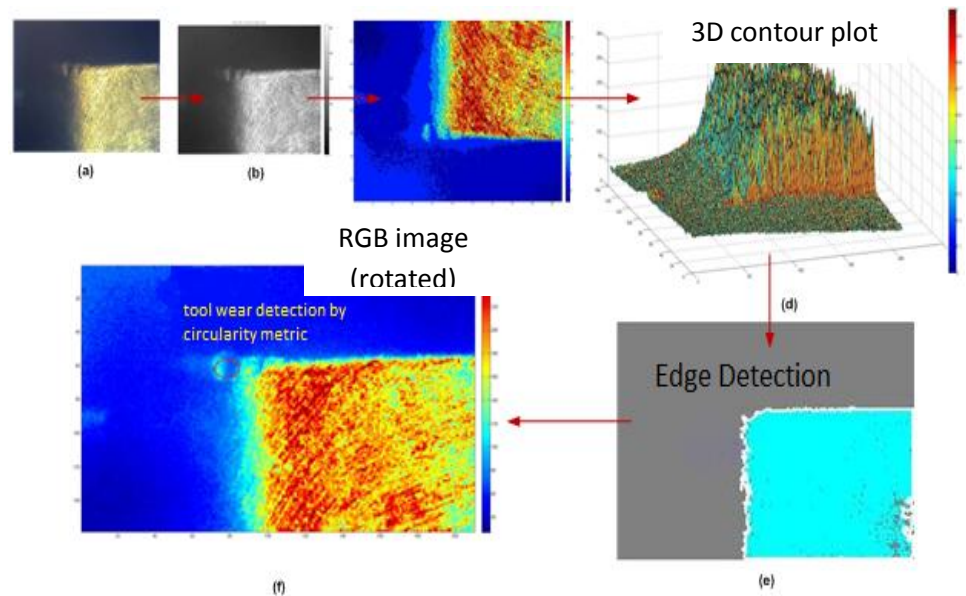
Image processing result sample for measuring tool wear [70]
